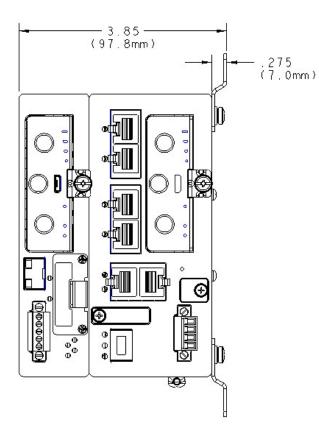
Wall/Floor mounting clearance and overall dimensions with mounting brackets attached
